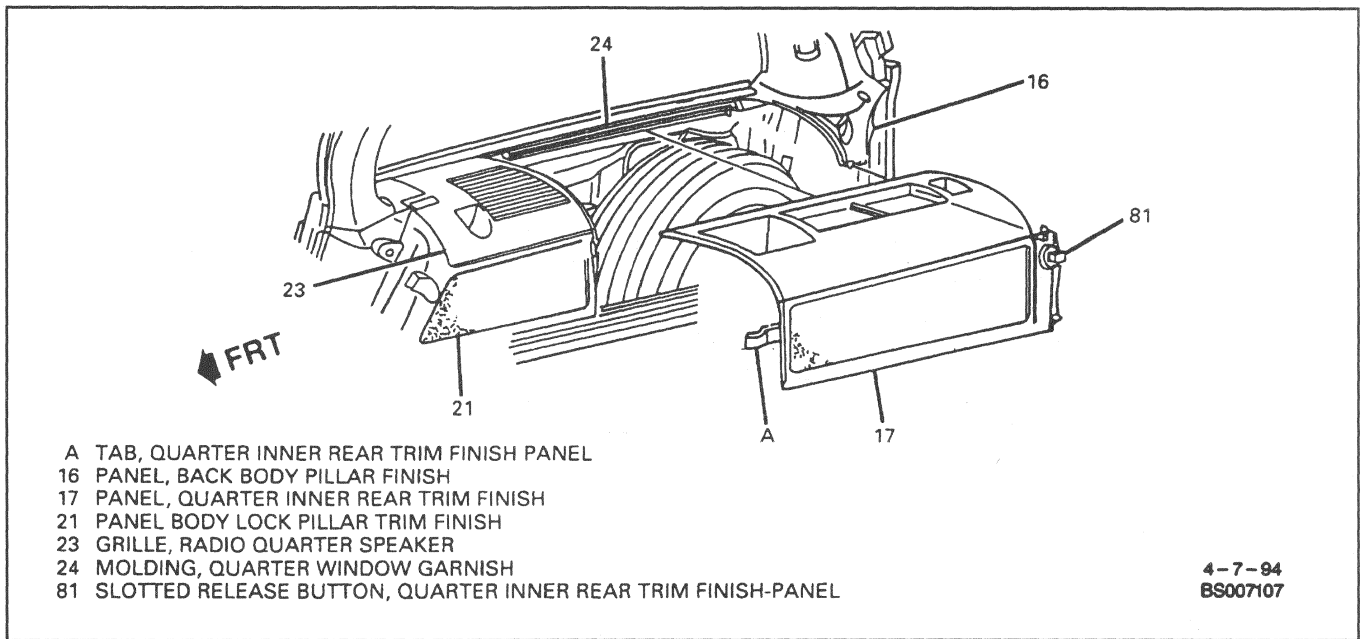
Quarter Inner Rear Trim Finish Panel - (Wagon)
